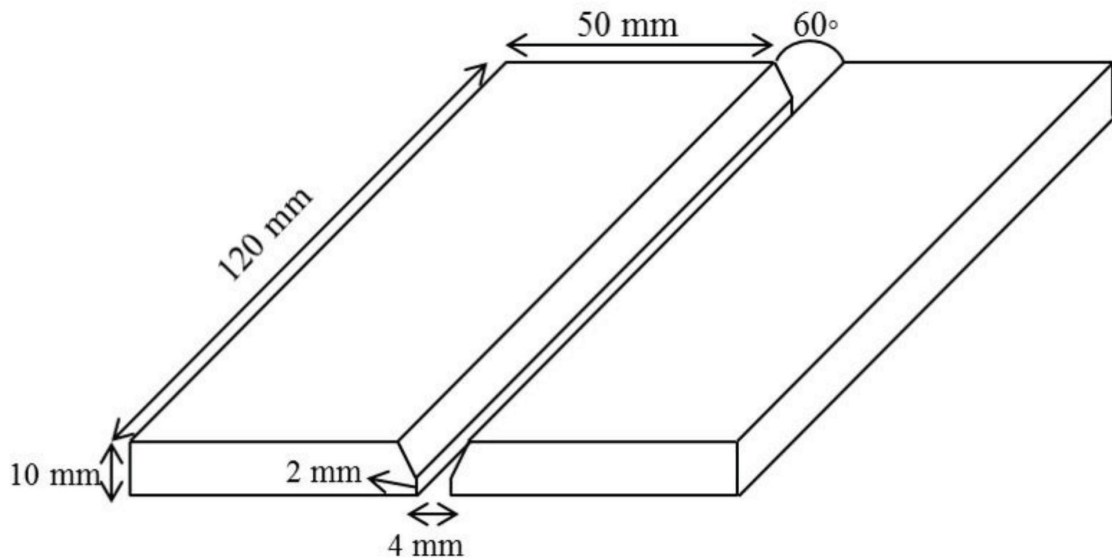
Dimensions of the plates and the used weld design.
